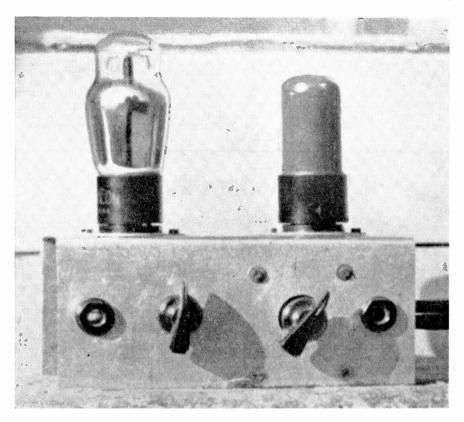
Chassis construction details. A single sheet of metal is used, bent up after the holes have been drilled out.
